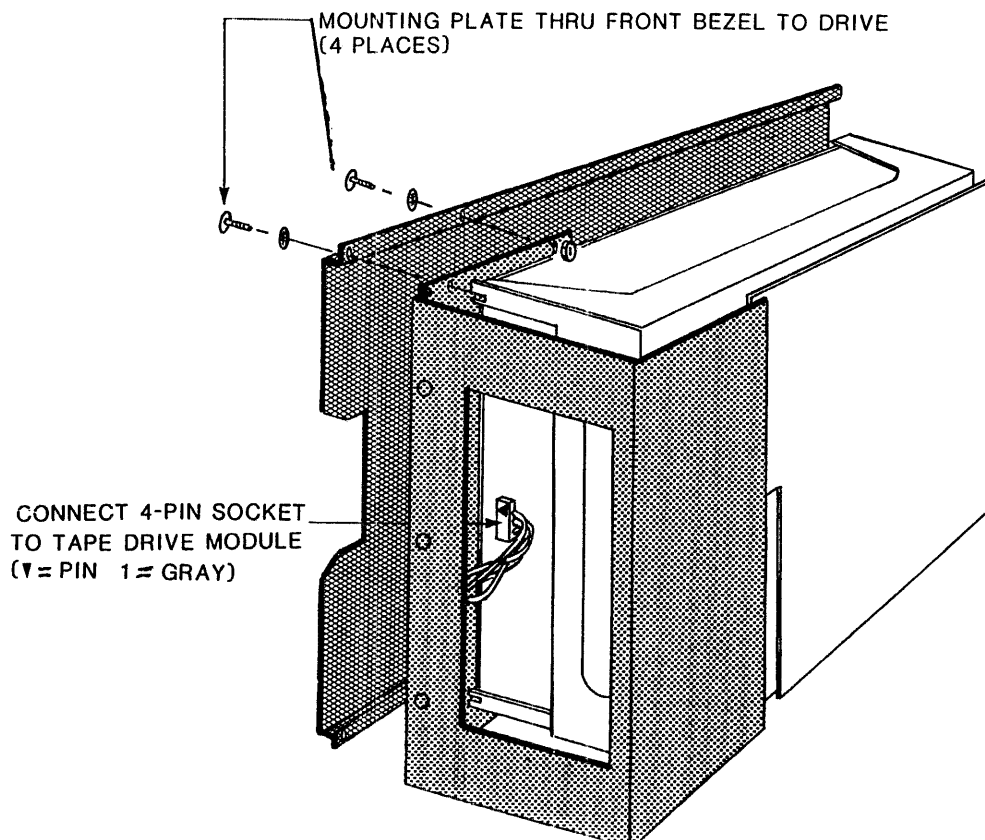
TAPE TRANSPORT MOUNTING BRACKET
